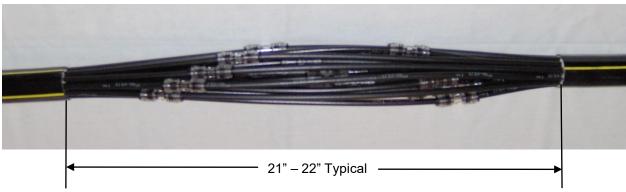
"Unique" Stagger Arrangement for 19-Tube Cable Example
